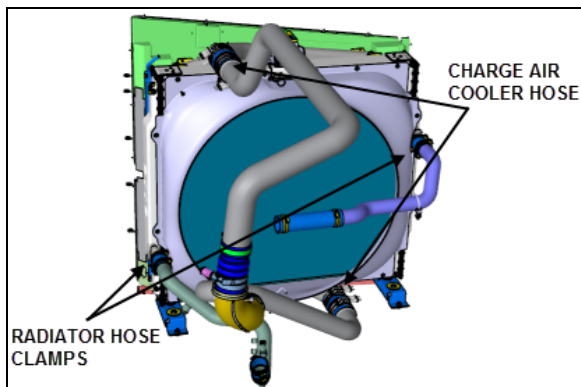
RADIATOR & CHARGE AIR COOLER HOSE CLAMPS
